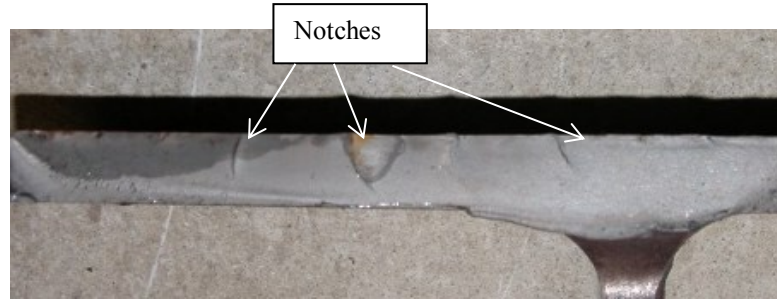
Clear edge notches in the fractured surface for side 2 of specimen N-N-2.
